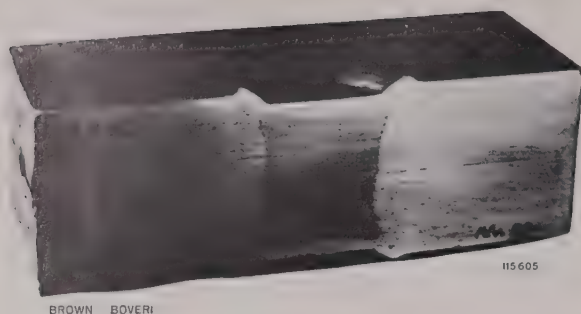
Macrograph through a spot weld in 52 steel 20 + 20 mm thick
